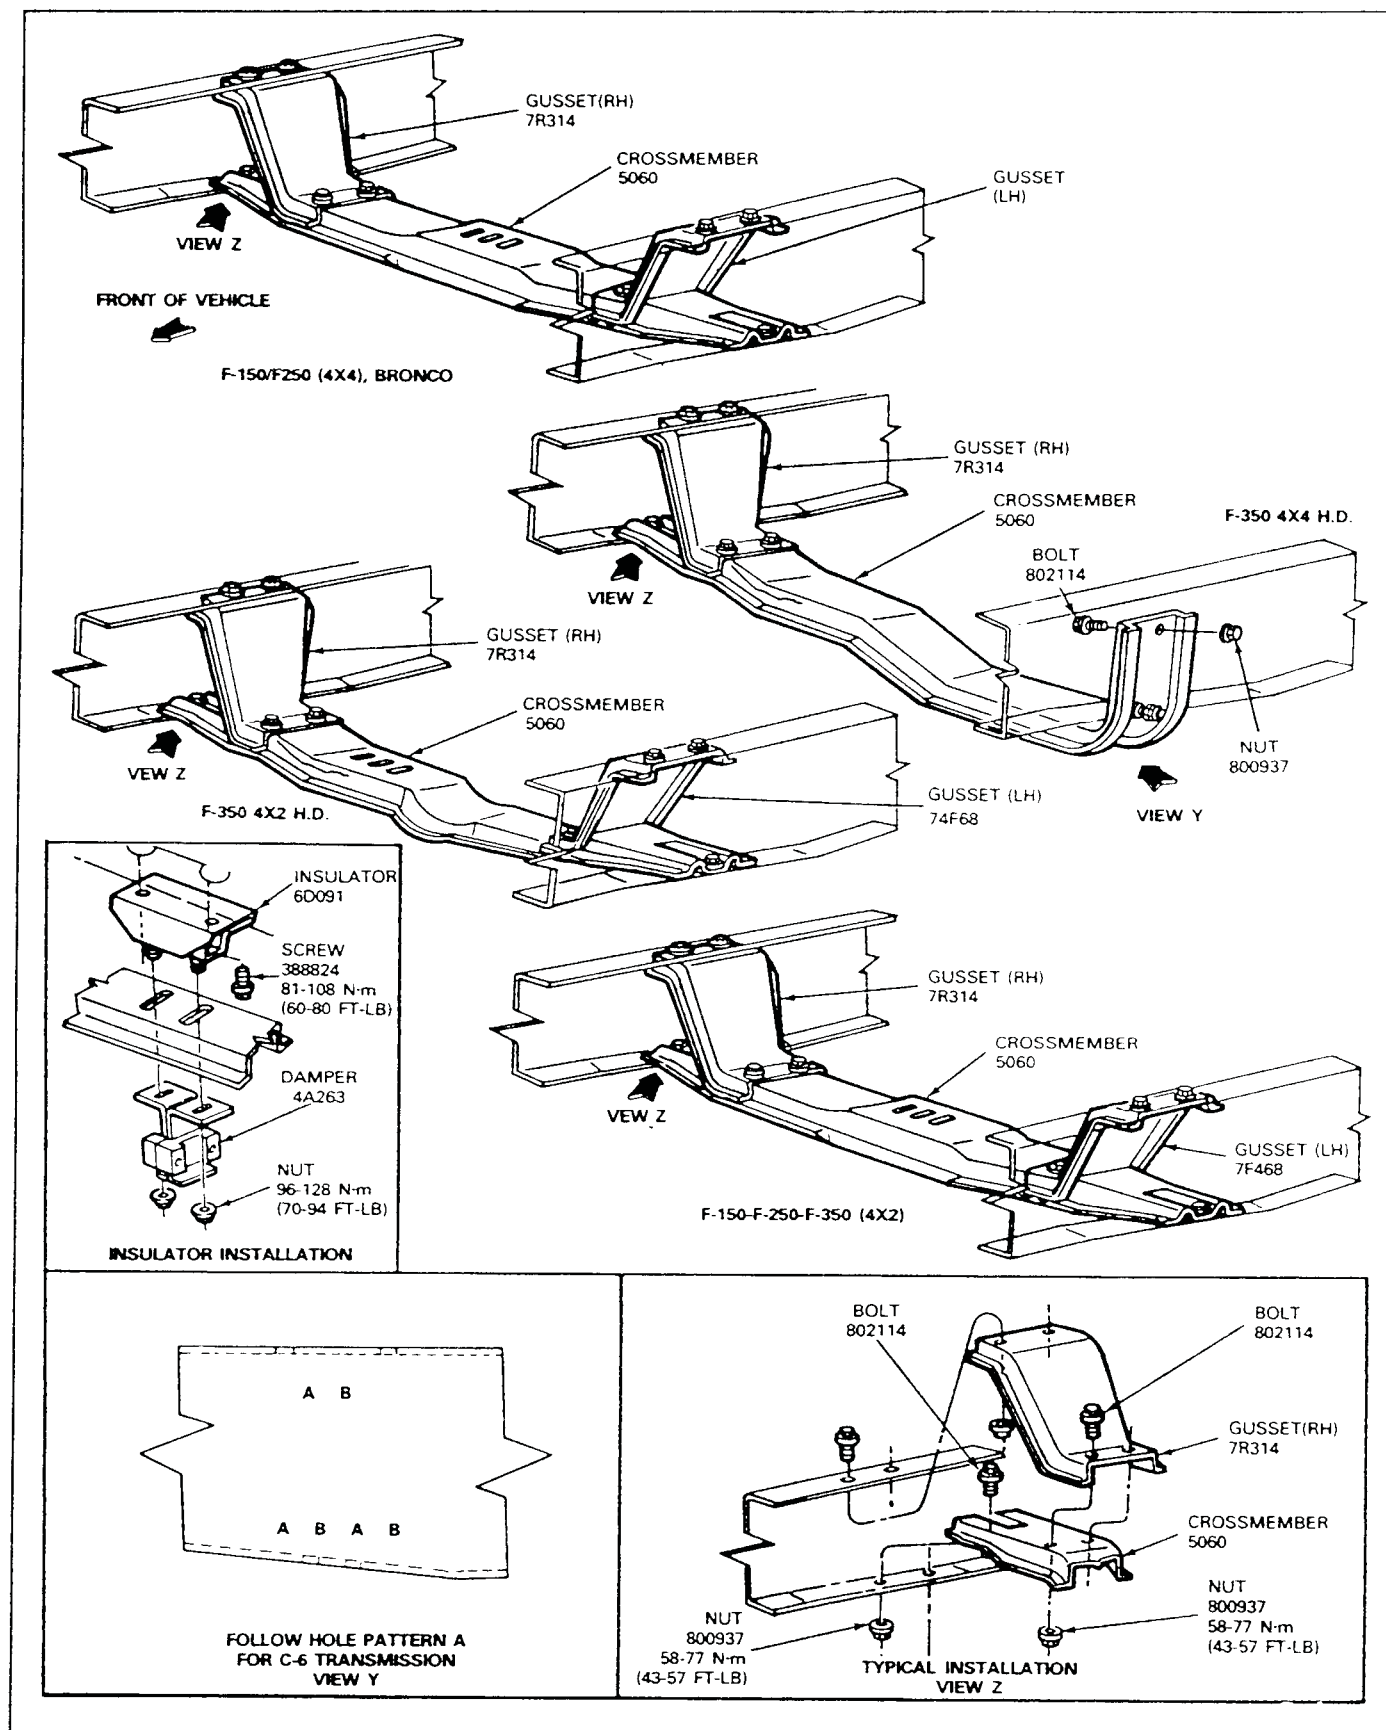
Crossmember Installation F-150—F-350 (4x2) (4x4)
